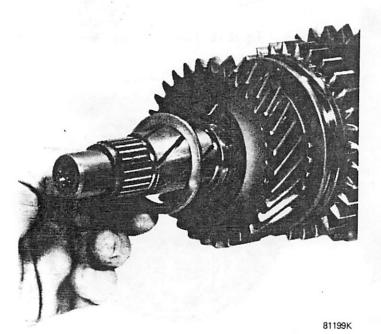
B-23 Second Gear Thrust Washer Removal/Installation
